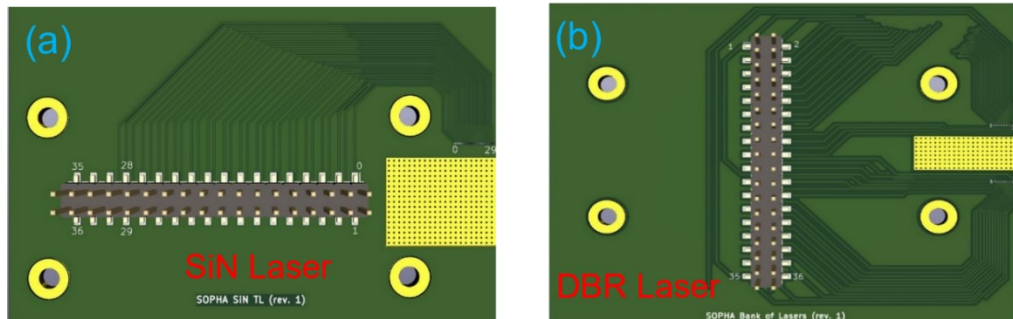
3D view of the PCB Design (a) for SiN laser (b) for DBR Bank of Lasers
